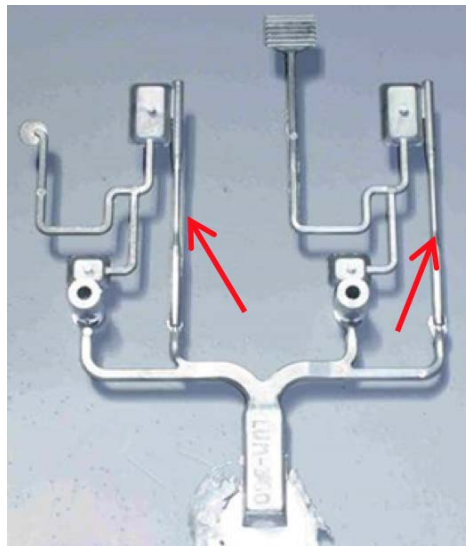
Photograph of a full shot produced using the die at Premier Tool and Die Casting. The two cast-to-size tensile bars are identified by the red arrows
